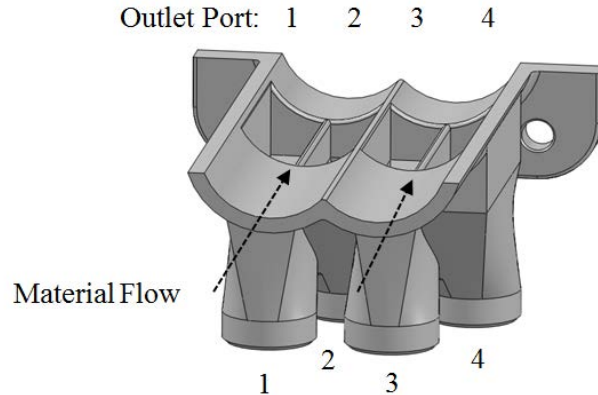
Cross-sectional view of the screw mixer housing's outlet ports allowing composition analysis to be performed (opaque material is shown for clarity).
